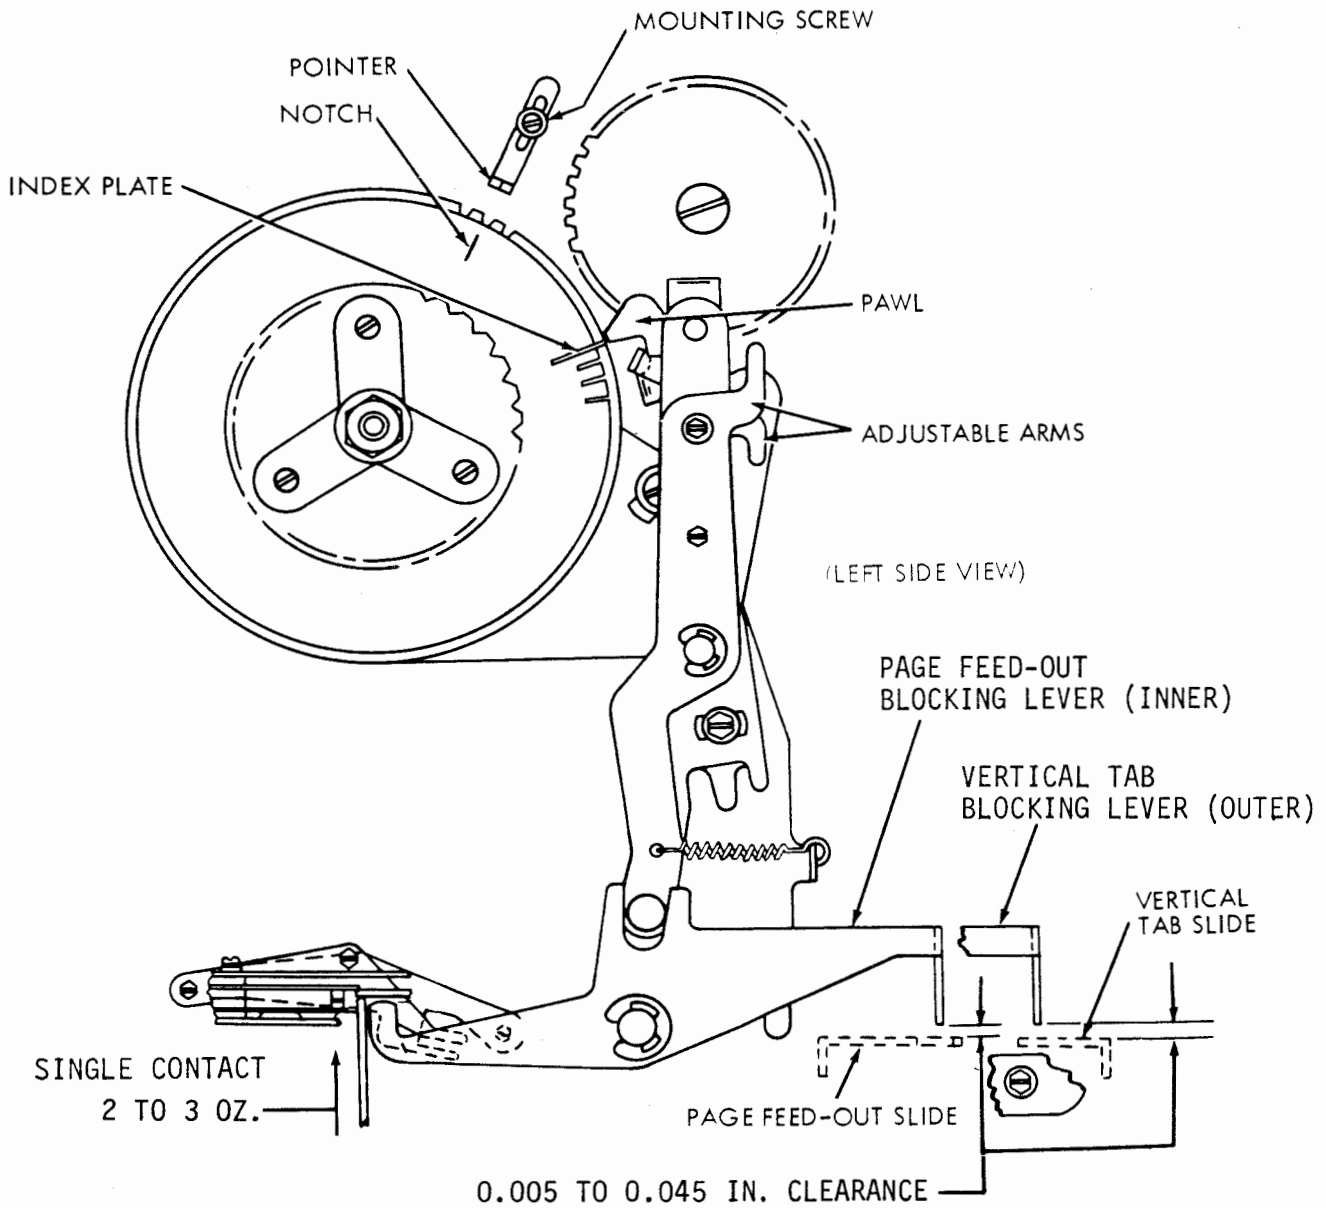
Blocking Lever, Pointer, and Switch Contact Pressure
